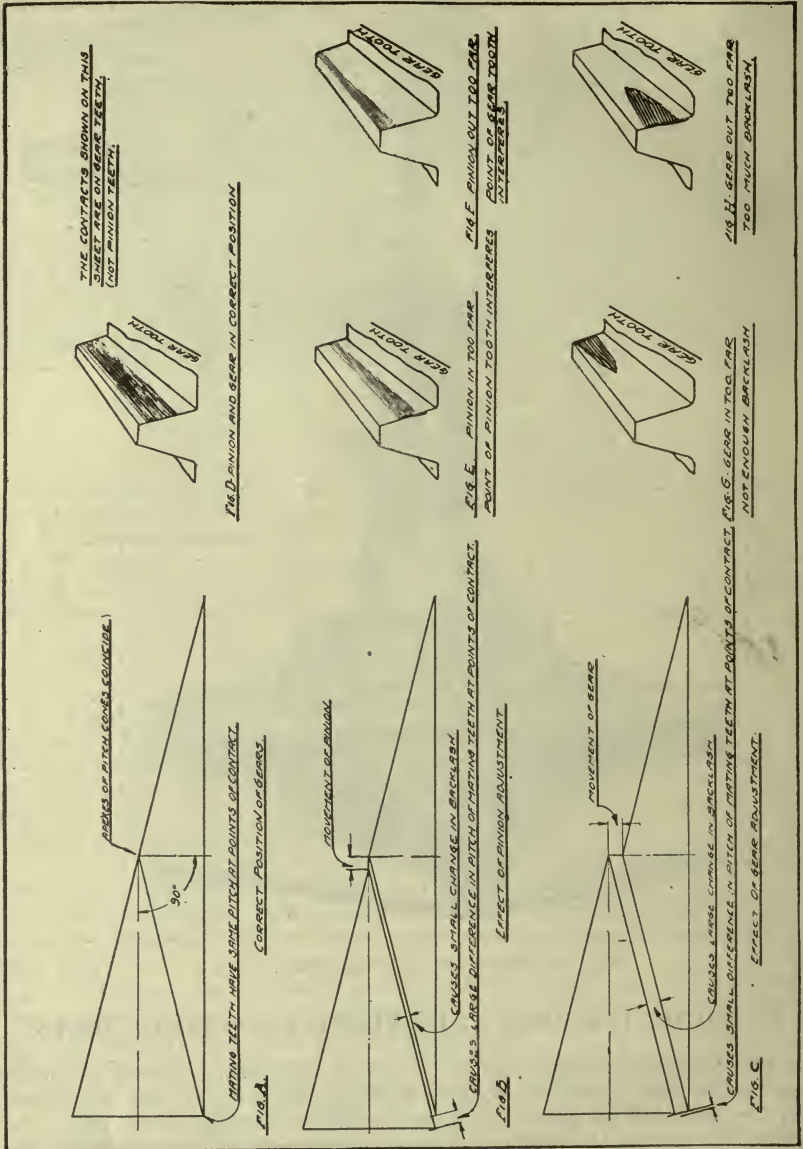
Graphic representation of correct and incorrect methods of adjusting pinion and bevel gears. (Courtesy King Motor Car Co.)
